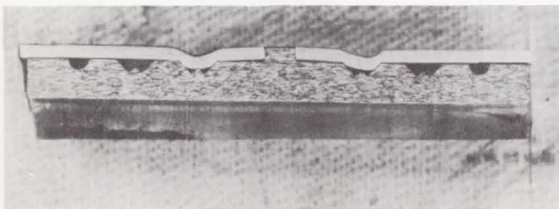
Cross-section of Explosive formed Permanent Joint Design (2024-T3 Insert, 6061-T6 Tubing, both aluminum)
